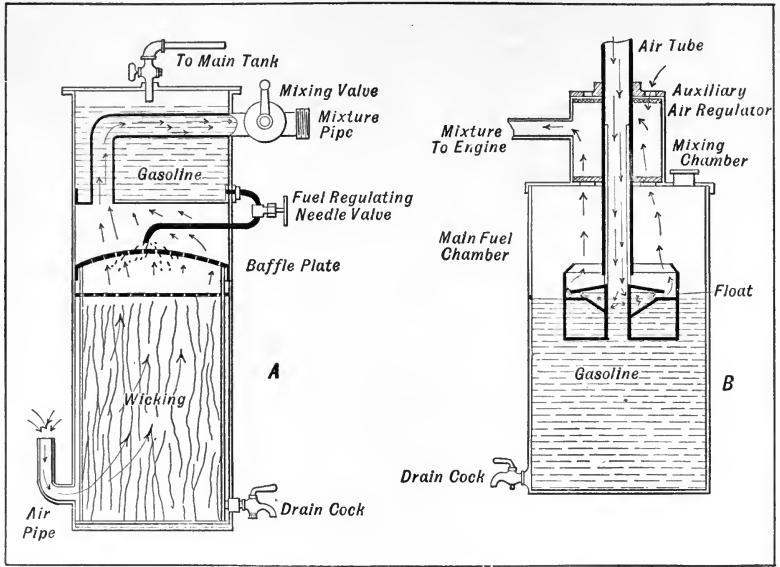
First Forms of Gasoline Vaporizers. A—An Early Wick Carburetor. B—Type in which Air is Drawn Through Fuel to Charge It with Explosive Vapor.
